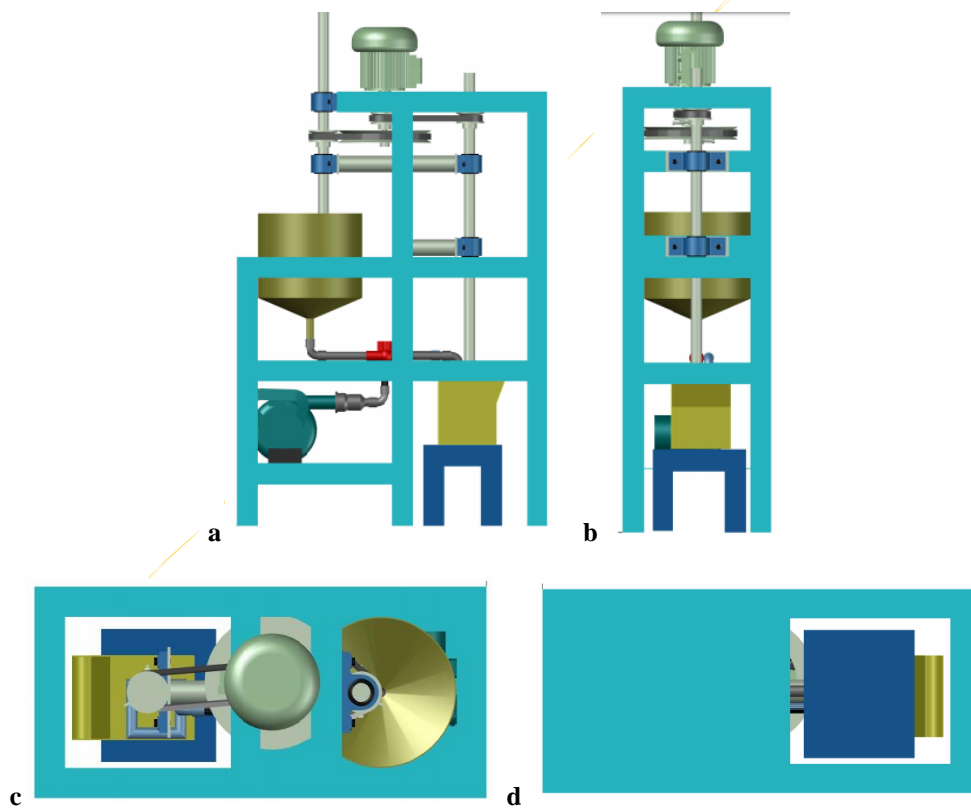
3D of (a) right, (b) back, (c) plan and (d) bottom views of flotation machine
